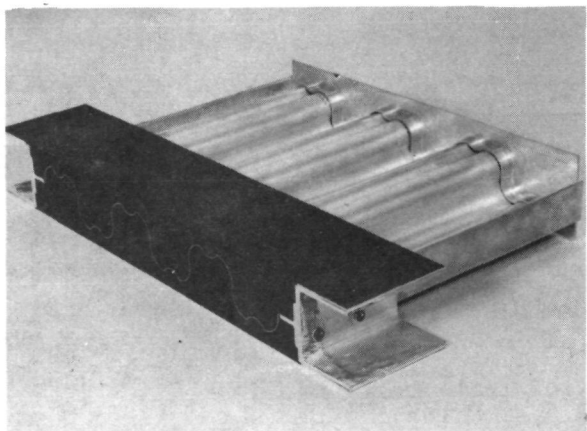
FLUTED SINGLE SHEET END ATTACHMENT SHEAR TEST SPECIMEN
